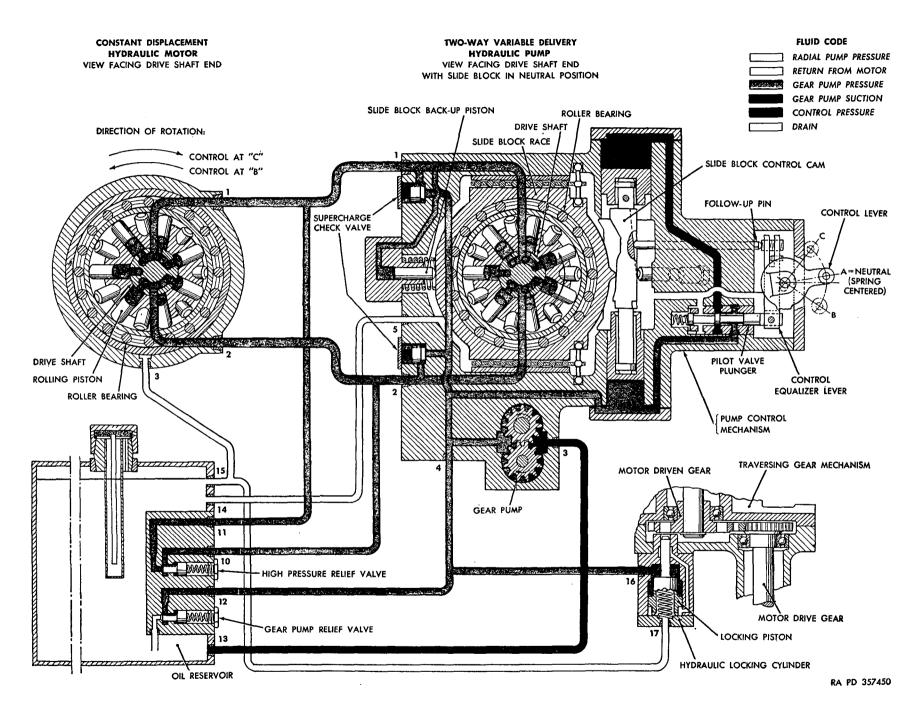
Hydraulic turret traversing mechanism oil circuit (neutral).
